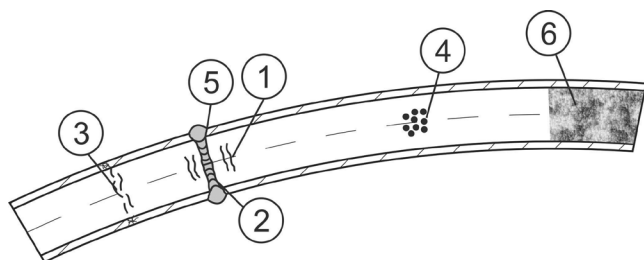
The observed damages of the steam coil pipe: 1 - circumferential cracks in the HAZ, 2 - depressions, cracks and voids in the root of the weld, 3 - cracks in the areas of stress concentration, 4 - clusters of pits, 5 - corrosion on welding joints defects, 6 - a thick layer of deposits
